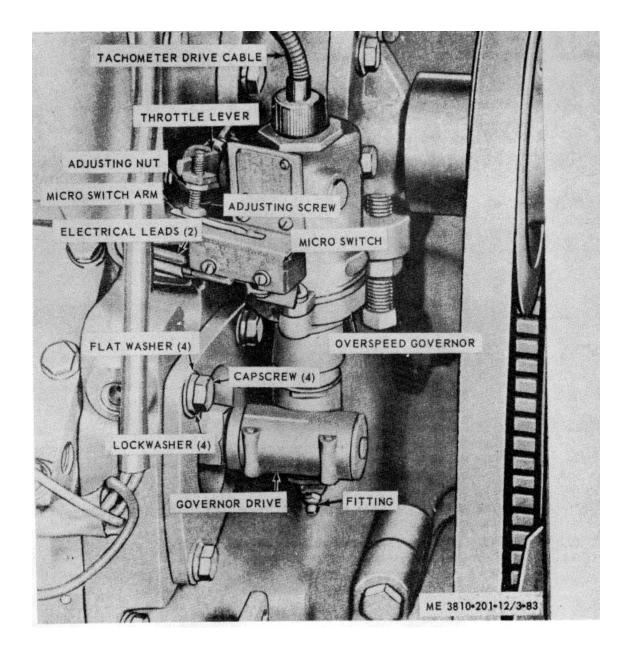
Overspeed governor, removal, installation, and speed adjustment (engine model 687C-18-ES).
